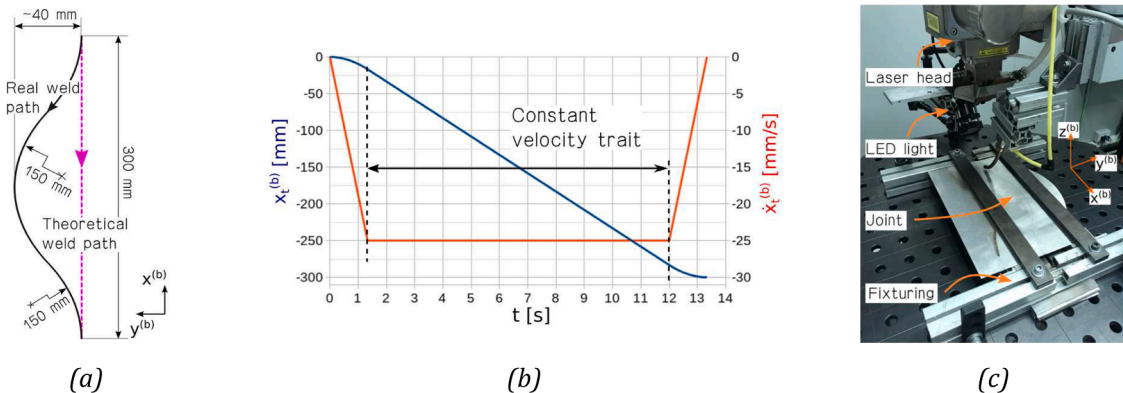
The details of the seam-tracking test. a) The tested curved welding path, b) the trapezoidal-velocity motion law, and c) the fixtures and setup of the welding tests.
